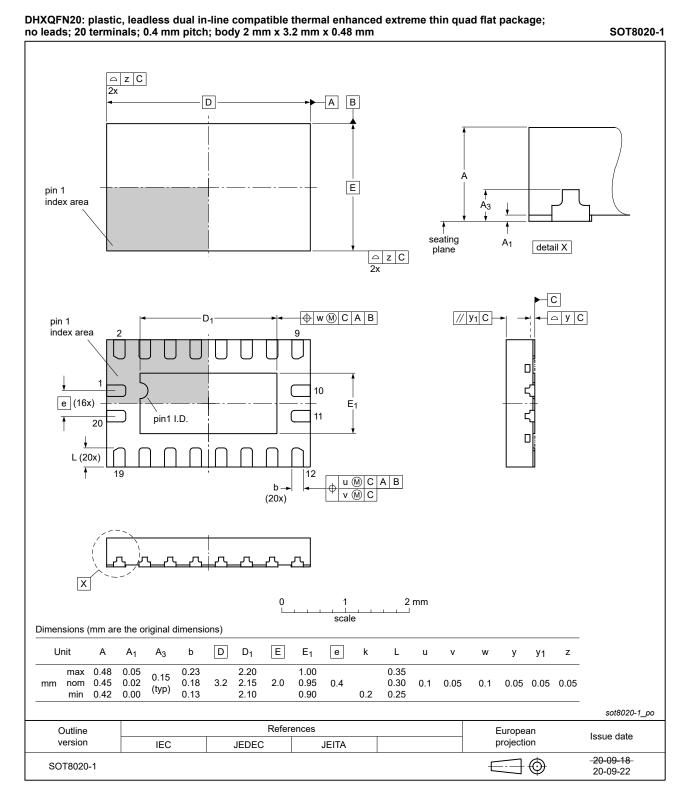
Package outline SOT8020-1 (DHXQFN20)
